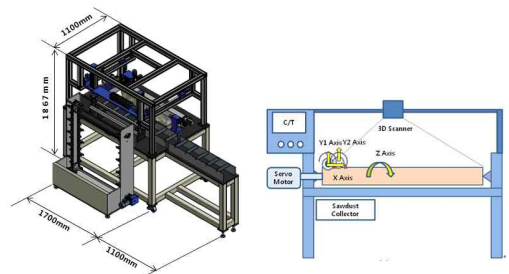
Design of rafter processing machine Fig.3 3D laser scanning system
